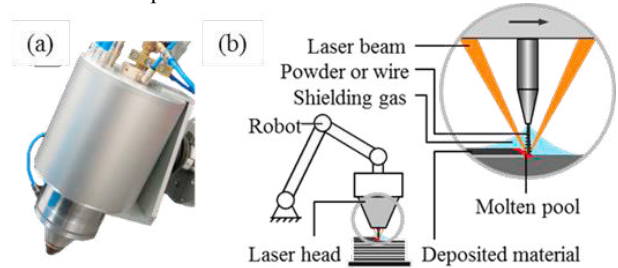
(a) Close-up of the laser head and (b) schematic of the coaxial laser beam and feeding lance arrangement.
